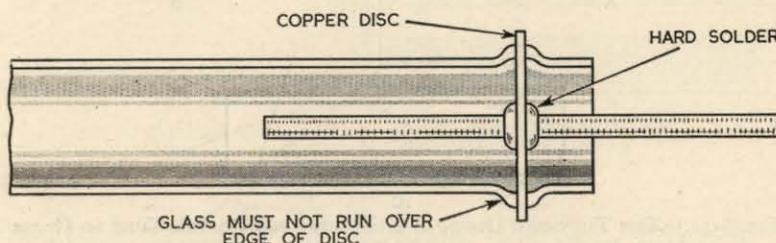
COPPER DISC SEAL IN POSITION
